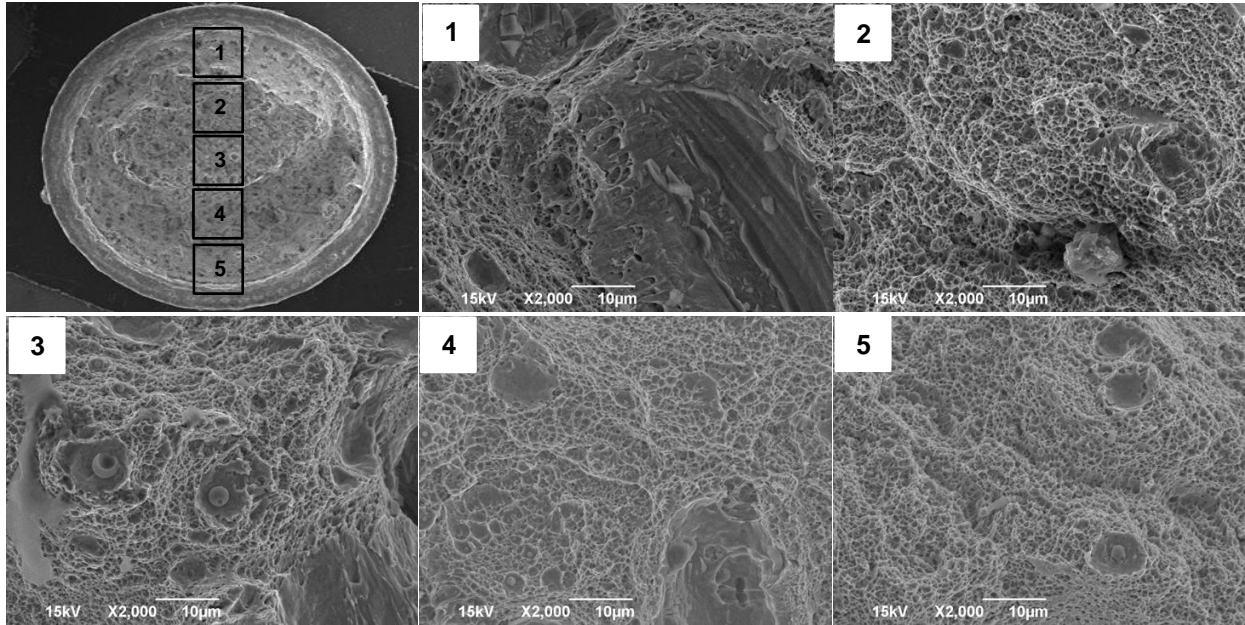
SEM analysis of the fracture surface of the AM notched 17-4 stainless steel specimen CN1 (notch radius 0.5 mm).
